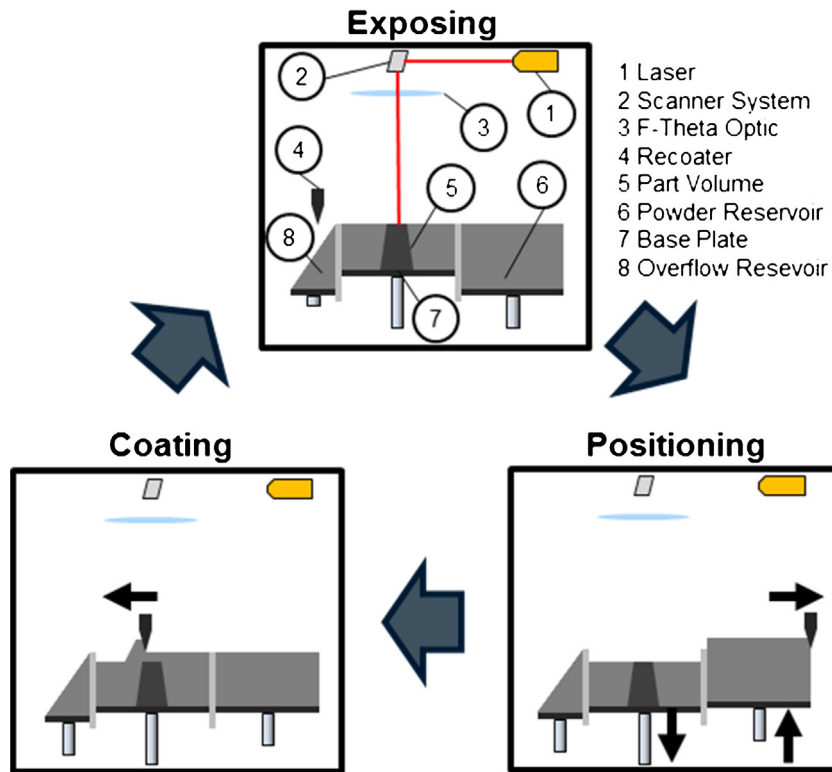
Basic Principle of selective laser beam melting at EOS Eosint M280 machine.
